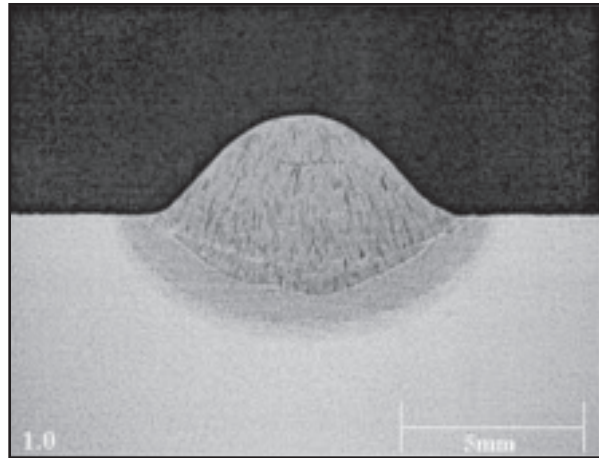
Example of cross-sectional macrostructure in bead-on-plate welding (12-mm-thick plate, no weaving, overhead position,  $n = 7.78$ , 198 A, 23 V, 7.7 mm/s,  $h = 70\%$ ). The macrostructure has a fusion zone shape representative of the other specimens of the simple penetration type.
